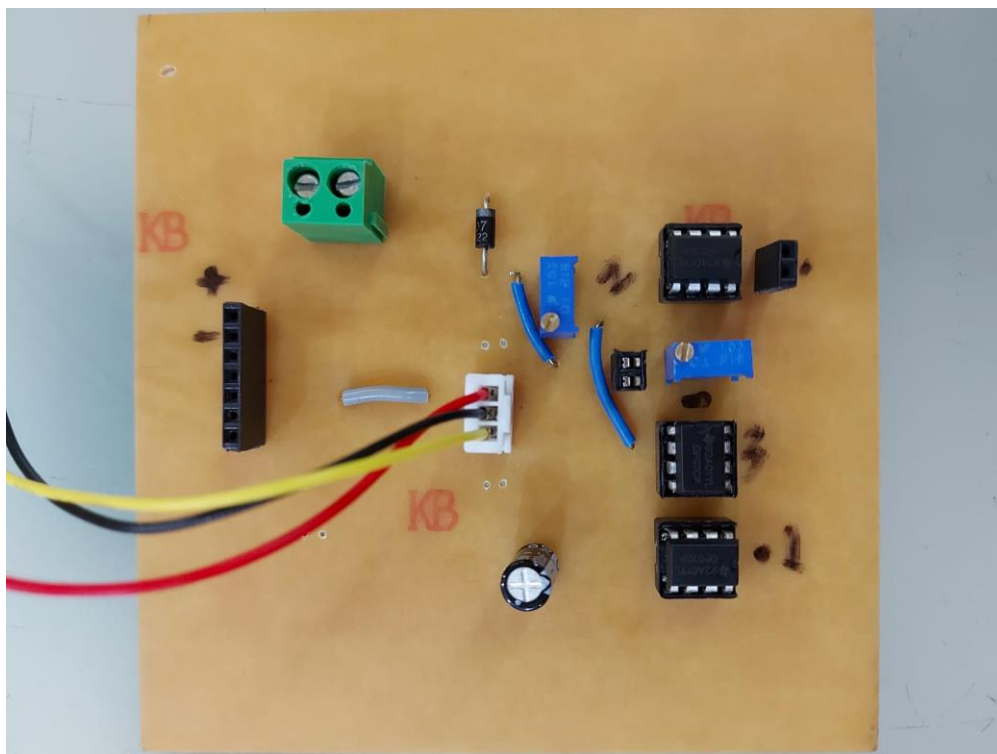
Incorporating Signal Acquisition circuit on a Printed Circuit board
